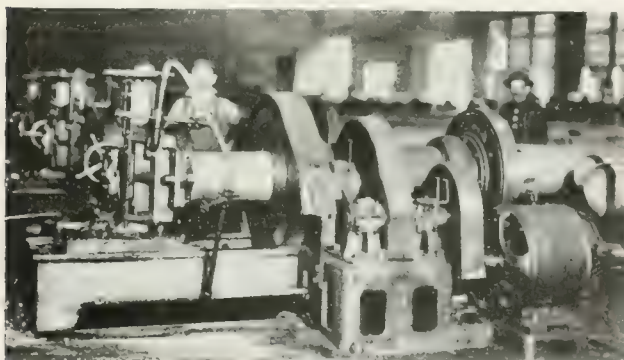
GUARDS ON TUBE MILL CUTTING MACHINES
